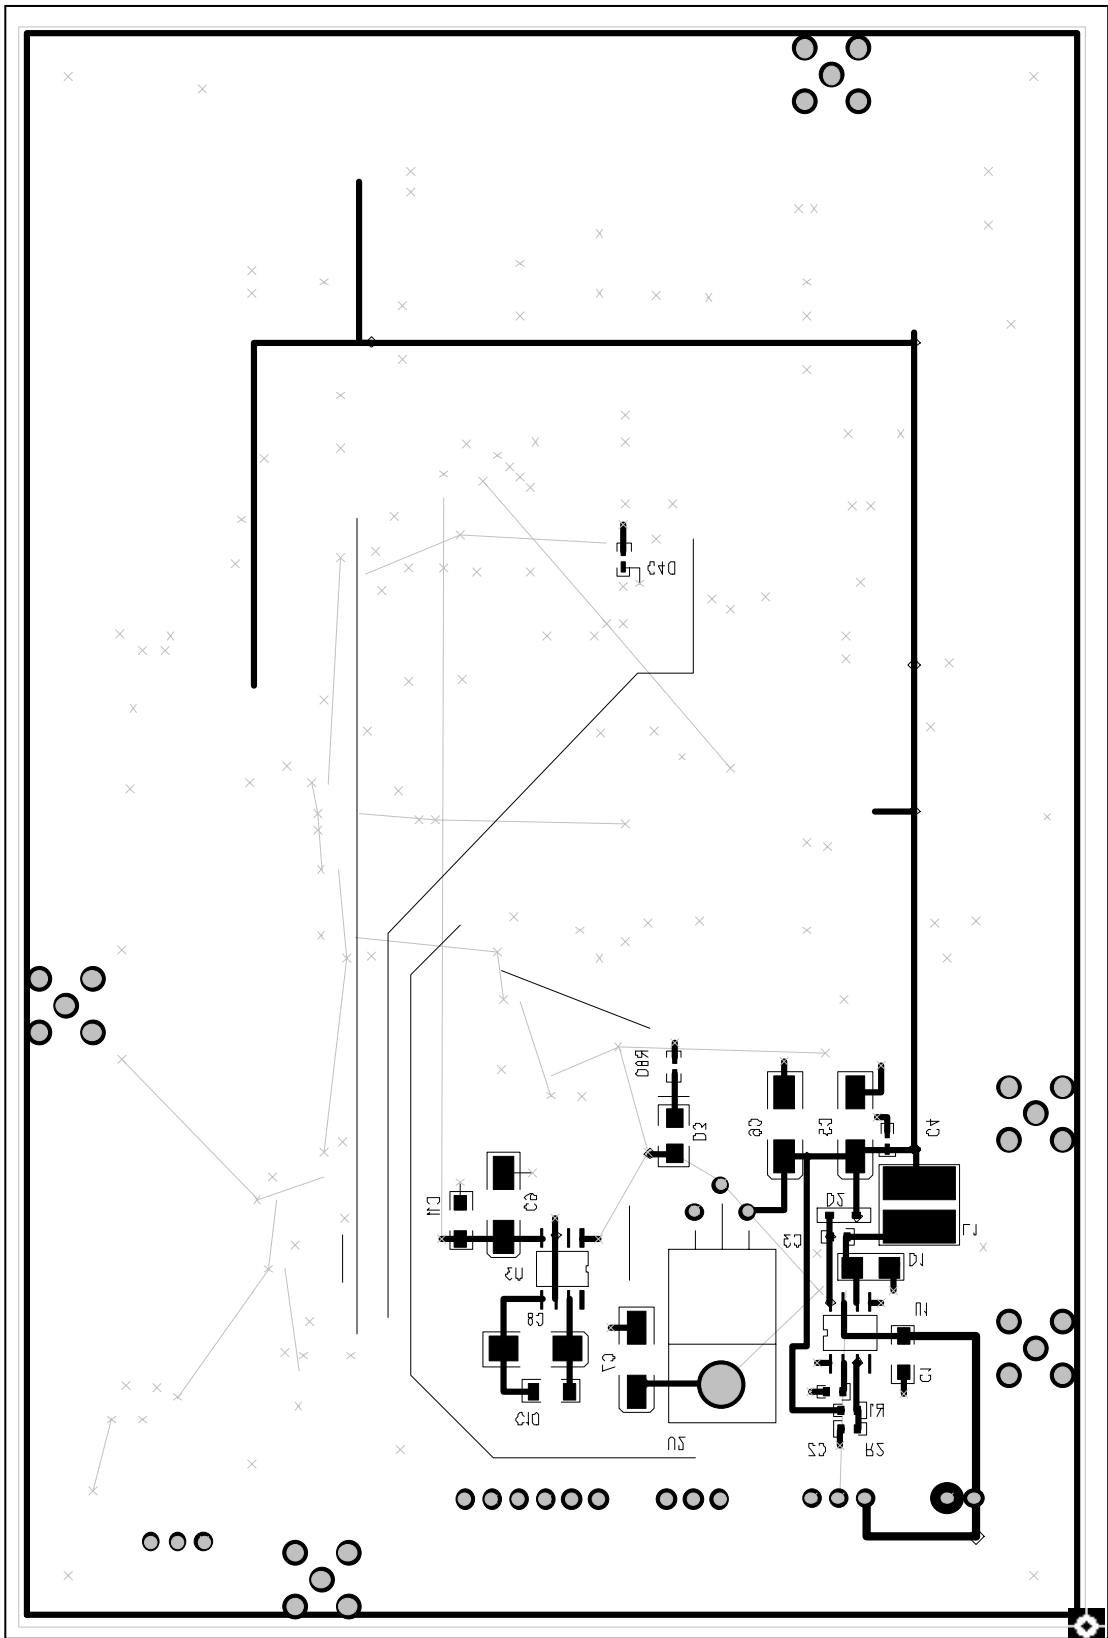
UWB Transmitter PCB Layout for Bottom Layer
